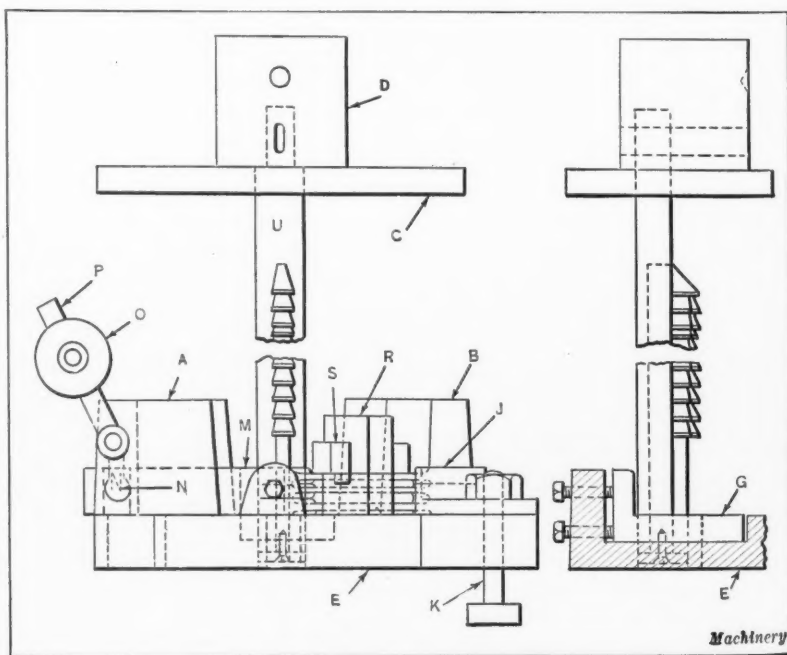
Elevation Views of Fixture shown in Fig. 1
